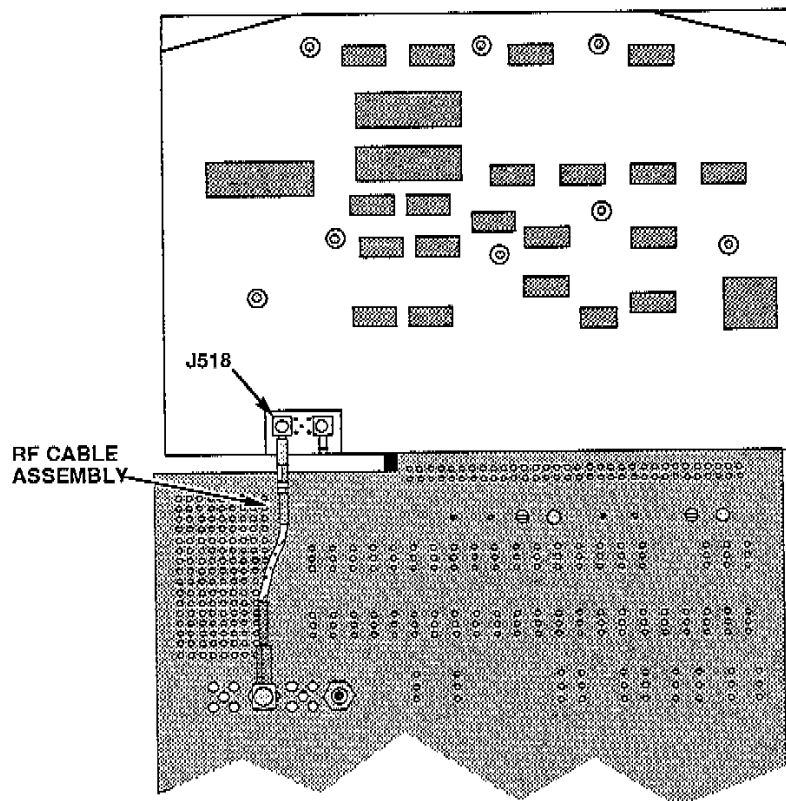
Connection on rear of Period Counter and X5 Multiplier assembly.
